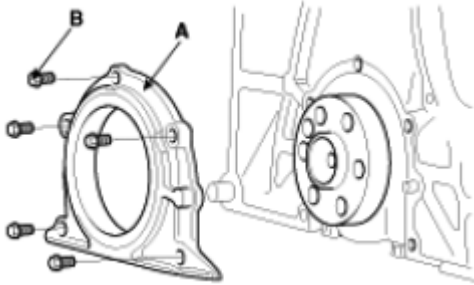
Identifying Rear Oil Seal Case And Bolts
